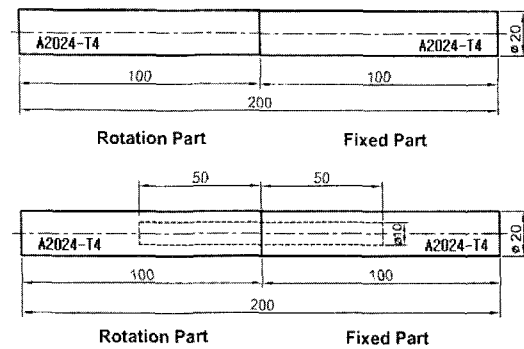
Shape and dimensions of friction welding specimens
